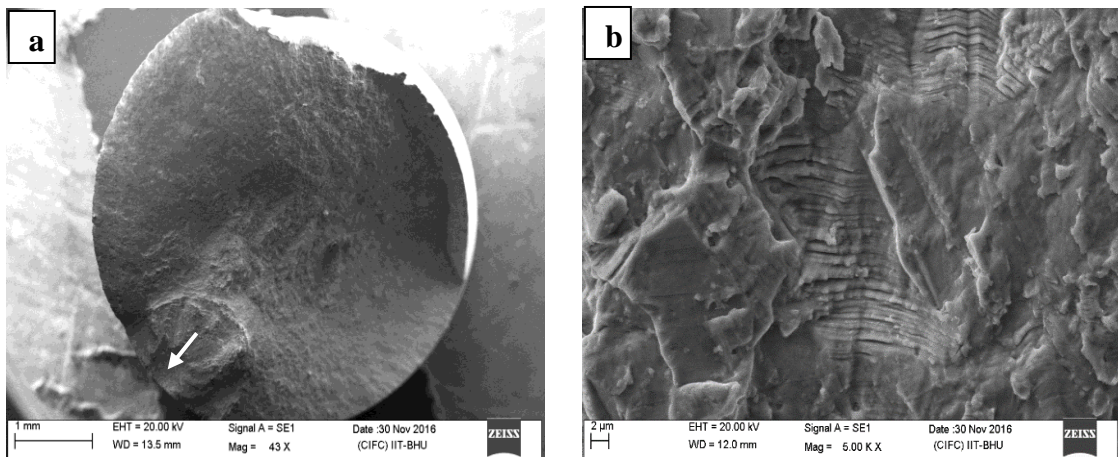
7: Fractographs of the sample fractured at the mean stress of 900 MPa ($R = 0.5$) at 600°C showing: (a) the fracture surface and crack initiation site, (b) transgranular crack propagation and fatigue striations.
